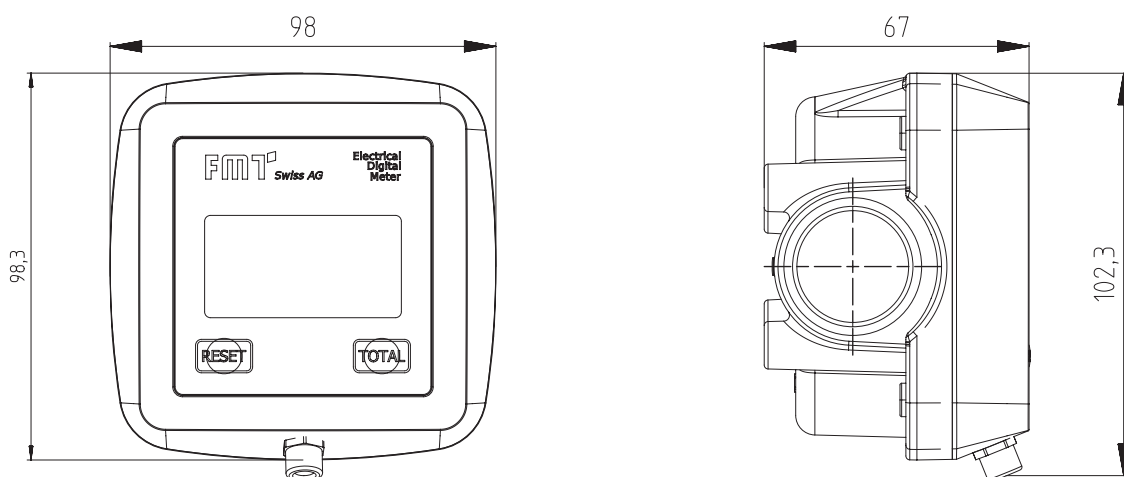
Mounting dimensions pulse meter and oval gear meter - digital with display (in mm)
